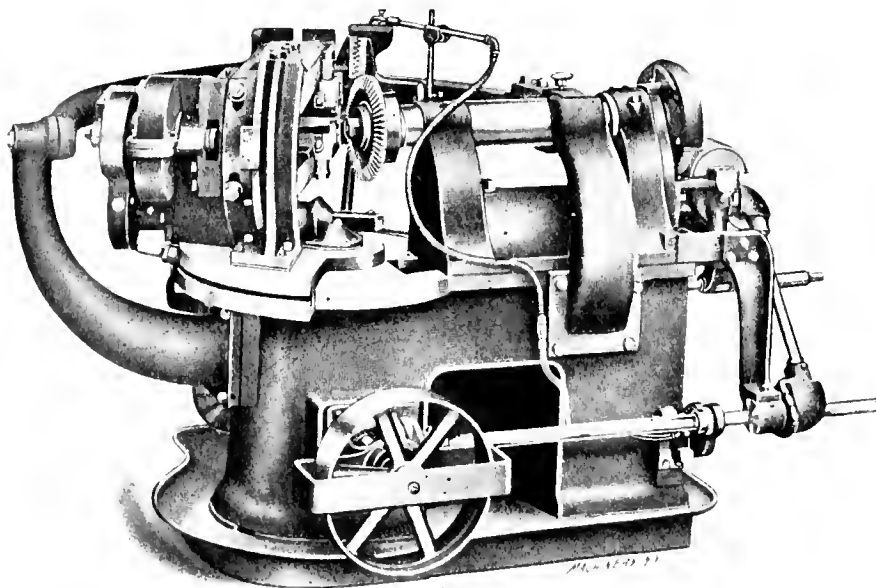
The Gleason Bevel Gear Generating Machine as first developed.
